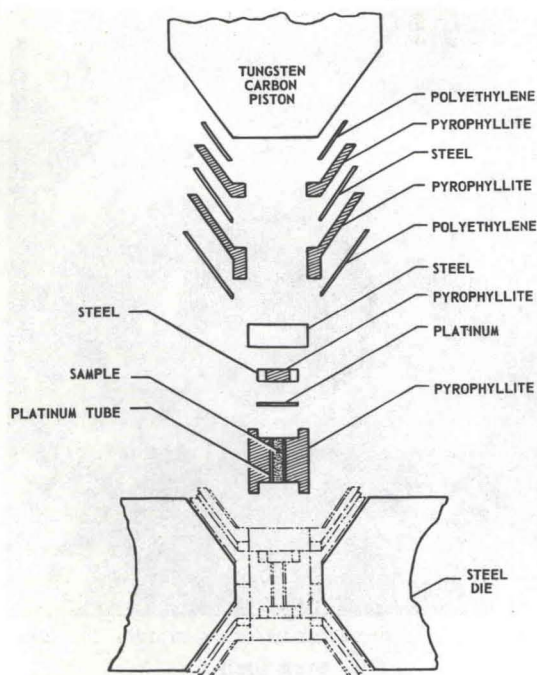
Schematic of specimen cell and gasket assembly in the revised girdle apparatus
